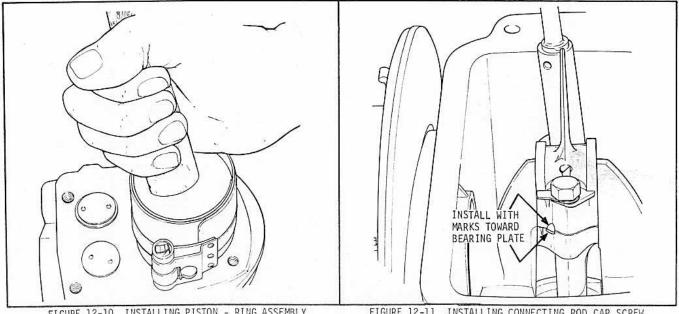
INSTALLING PISTON - RING ASSEMBLY
